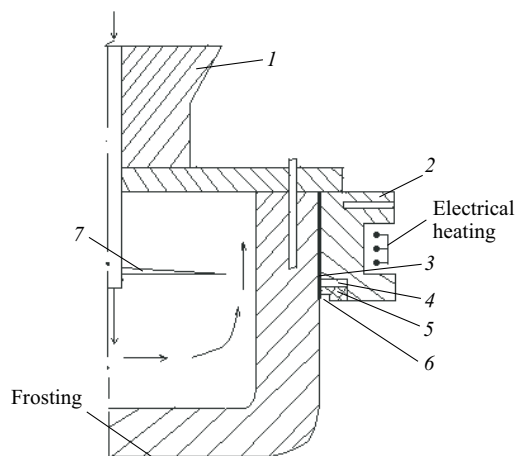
Main design specifics of the punch and the ring for screen production: 1) punch; 2) ring; 3) wear-resistant coating; 4) groove; 5) insert; 6) lock; 7) distributor.
